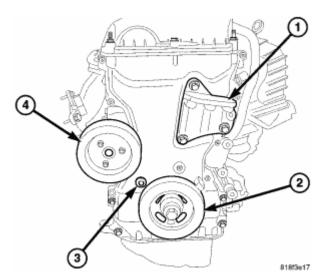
Engine Front Courtesy of CHRYSLER LLC
